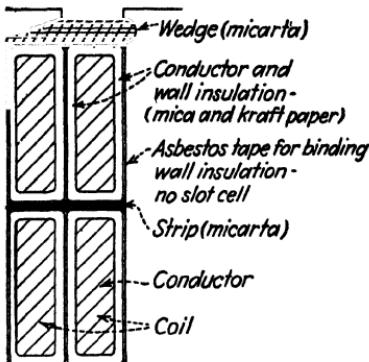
Overhung rotor-slot of 2,500-hp. induction motor. Class B insulation. (Courtesy of Westinghouse Electric & Manufacturing Co.)
